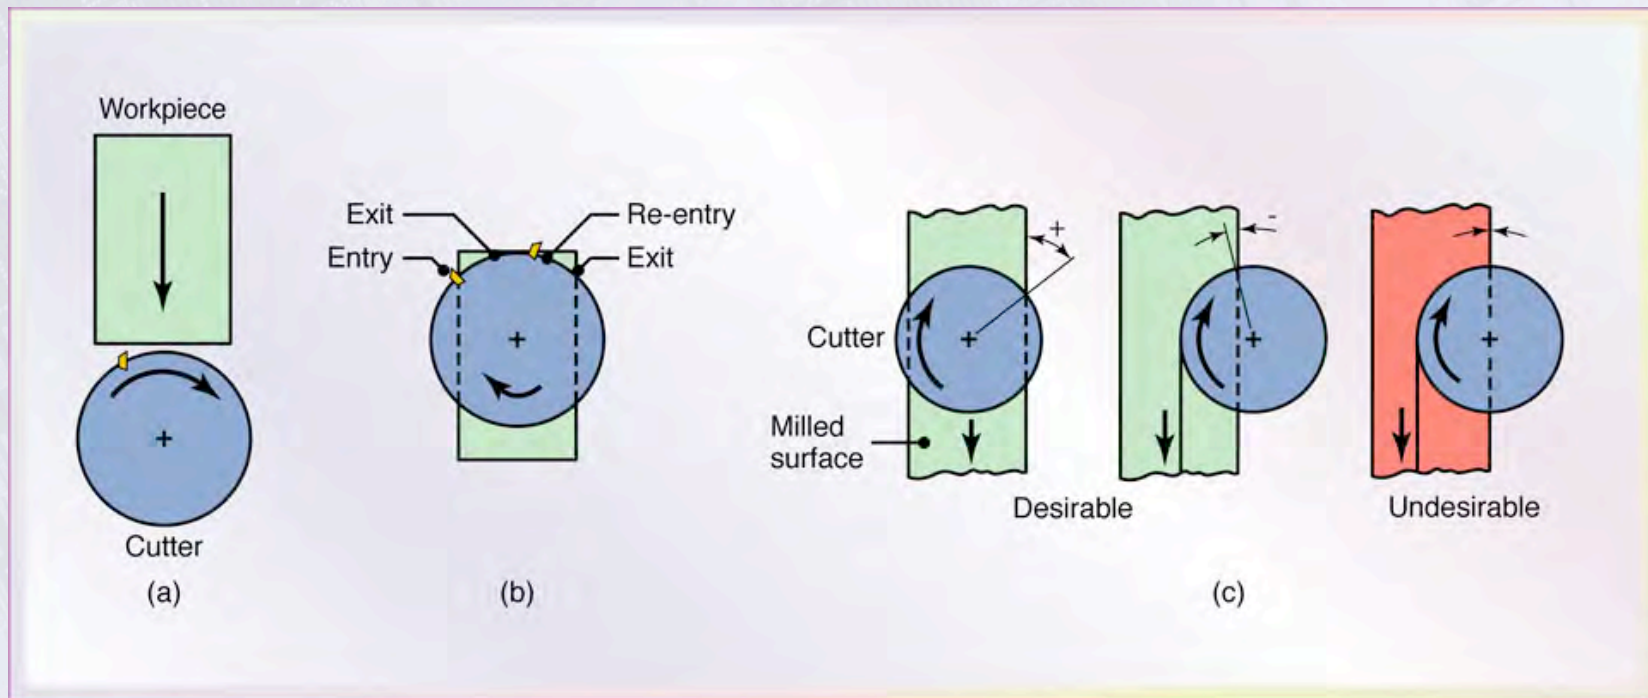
(a) Relative position of the cutter and insert as it first engages the workpiece in face milling. (b) Insert positions towards the end of cut. (c) Examples of exit angles of insert, showing desirable (positive or negative angle) and undesirable (zero angle) positions. In all figures, the cutter spindle is perpendicular to the page and rotates clockwise.
